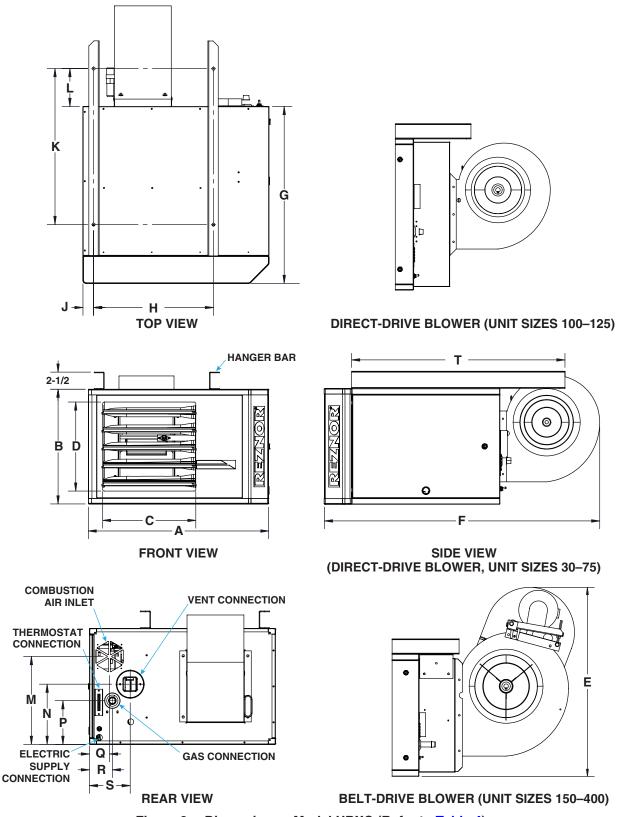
Dimensions—Model UBXC (Refer to Table 4)
